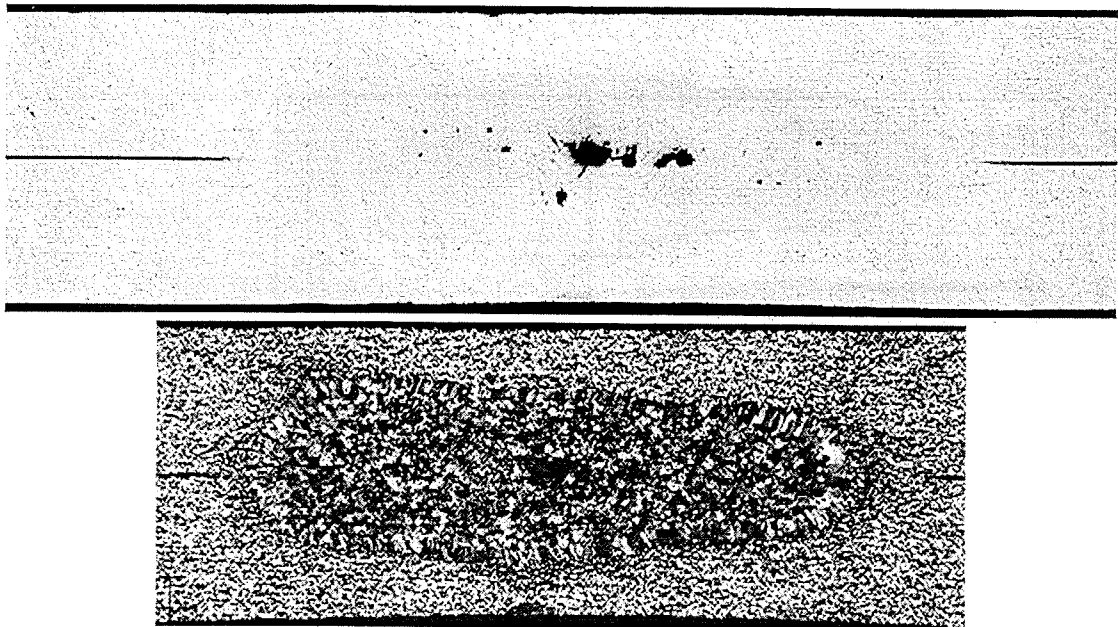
Cross section of a typical region-III weld (5.5 mm weld button diameter).
